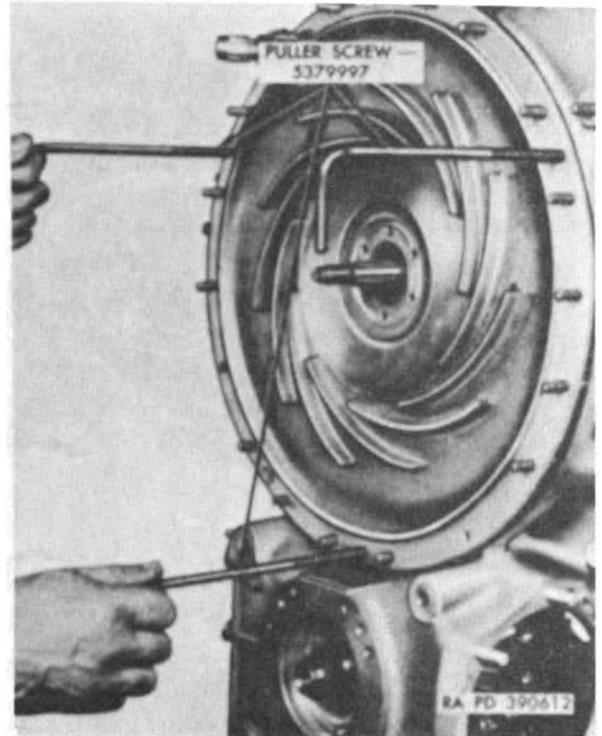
Removing or Torquing supercharger impeller locking nut.
